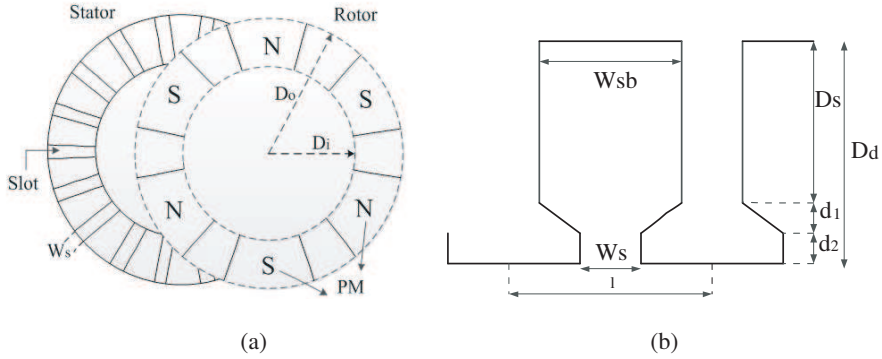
Double-sided axial-flux permanent-magnet construction. (a) Stator and rotor of the AFPM machine configuration. (b) Internal stator slot configuration.
